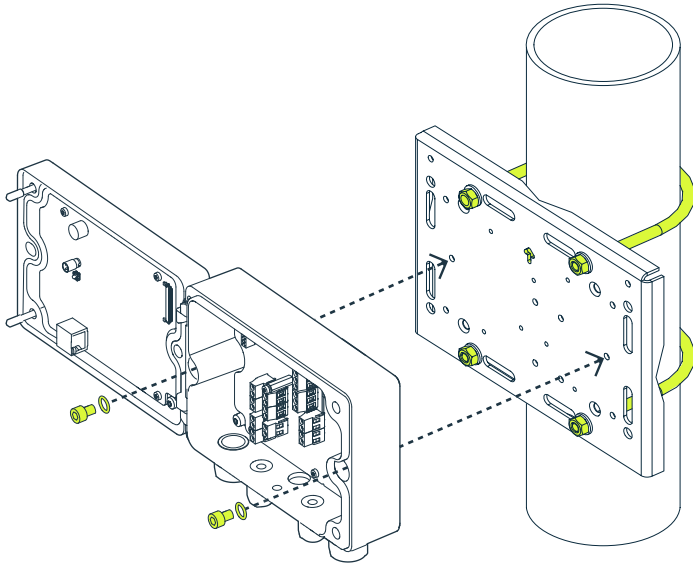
Attaching transmitter to mounting plate - vertical pole mounting
